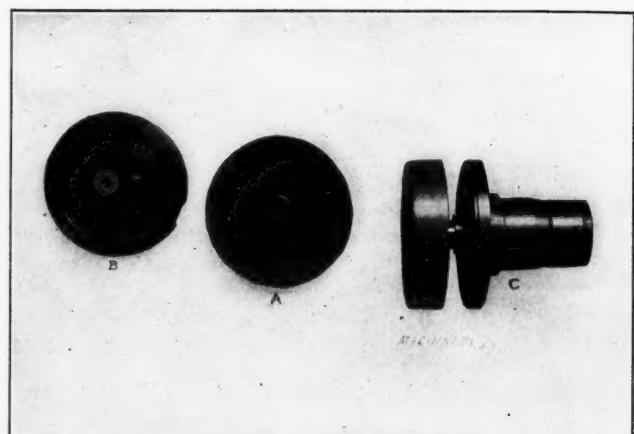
Turntable of the Block with Jig and Chuck for Machining it
